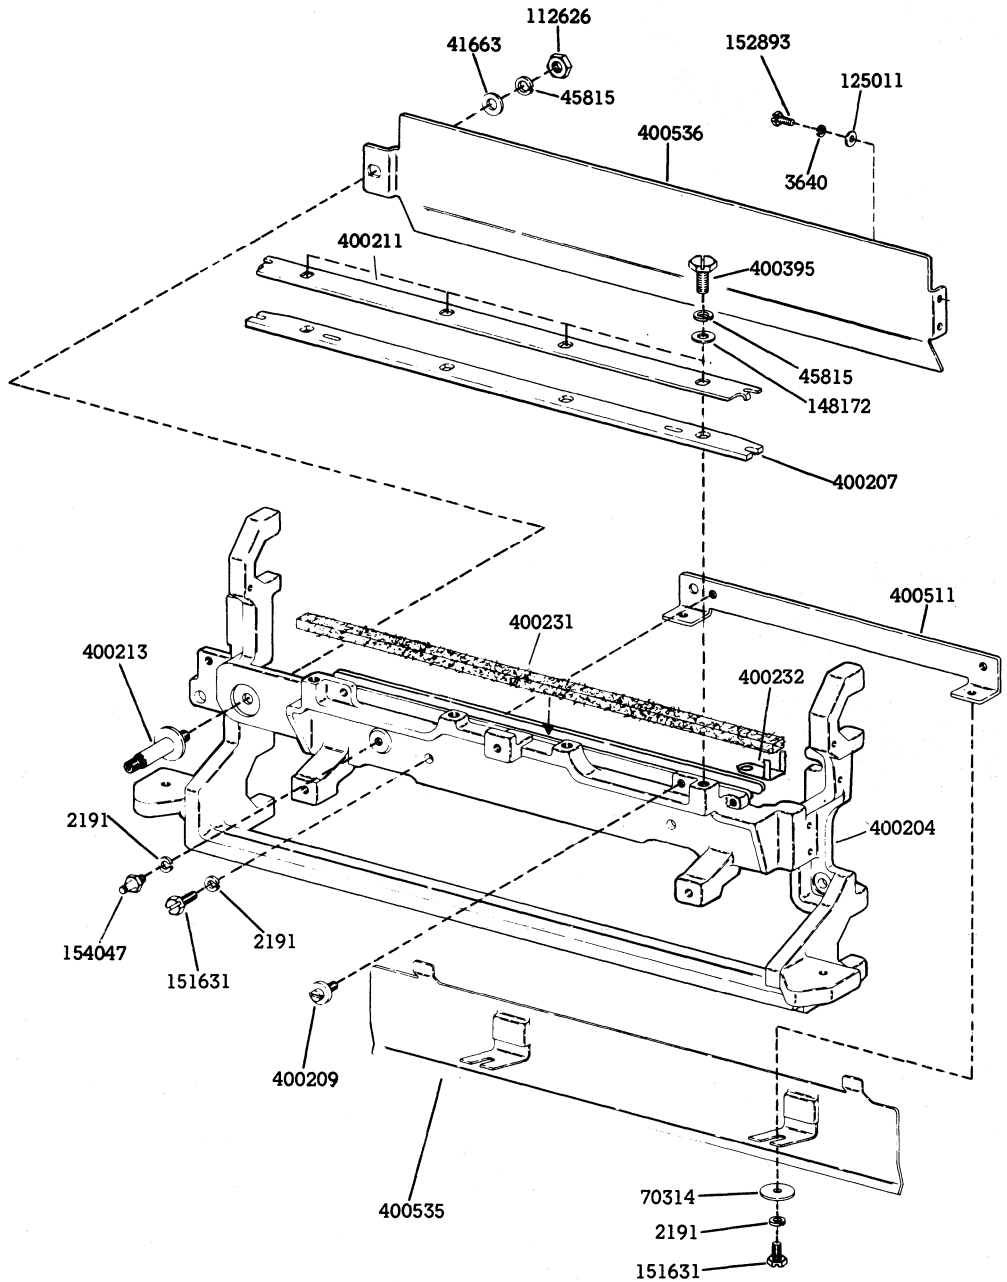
Front Casting Assembly (Friction Feed - 40P101 Early Design)
